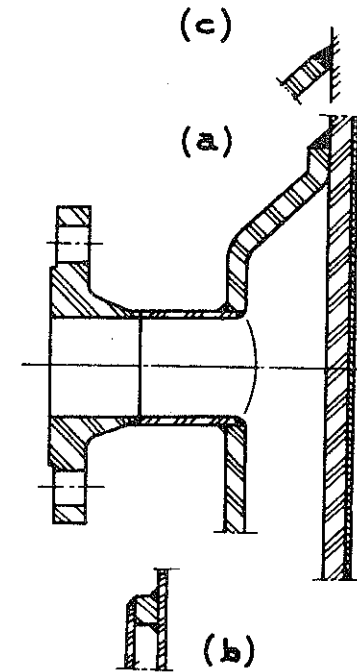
Jacket welded to pressure vessel shell
